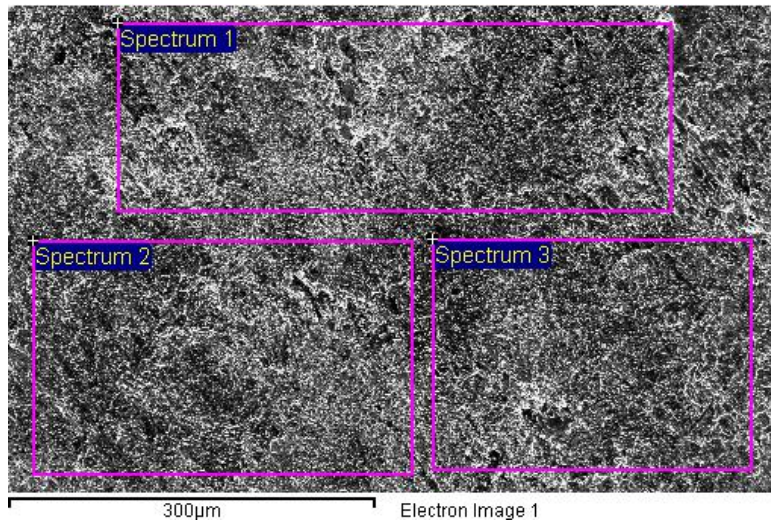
Die Shear Fracture Surfaces of AuGe on Electroless Ni:P Sample Aged for 3000 hours at 325°C(at.%)
